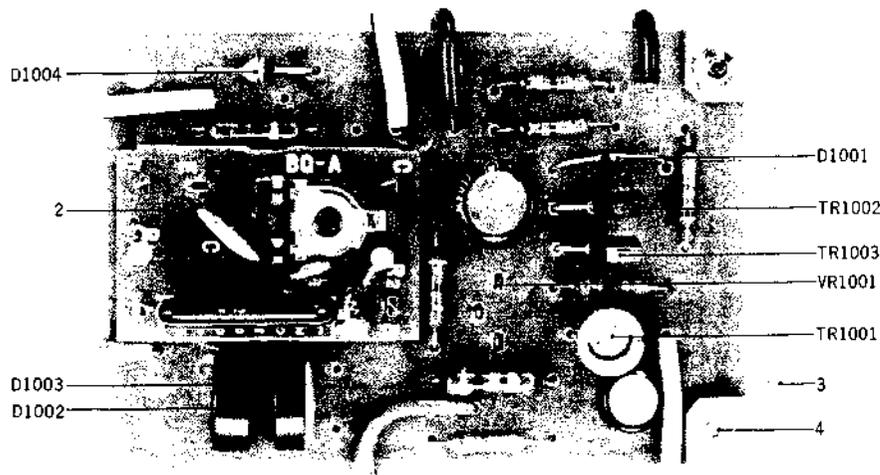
PHOTO OF FINAL ASSEMBLY BLOCK
